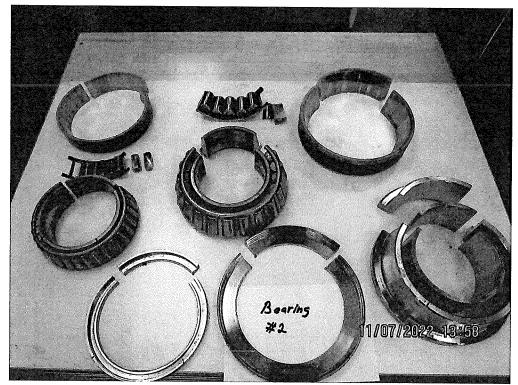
A disassembled and cleaned bearing assy #2 laid out for viewing.
